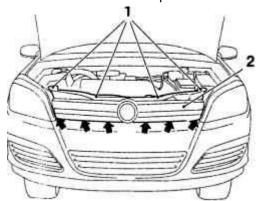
Rivet fastening decorative radiator grille (the arrows indicate the location of catches): 1 - rivet fastening, 2 - decorative grille
